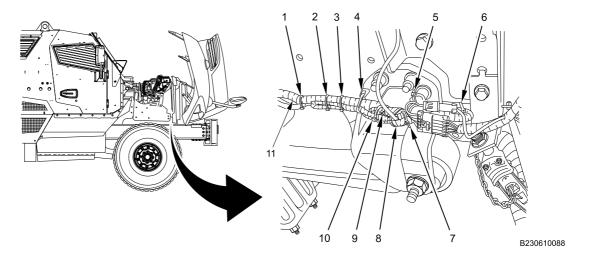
Front Bumper Right Harness Cable Lock Straps.
